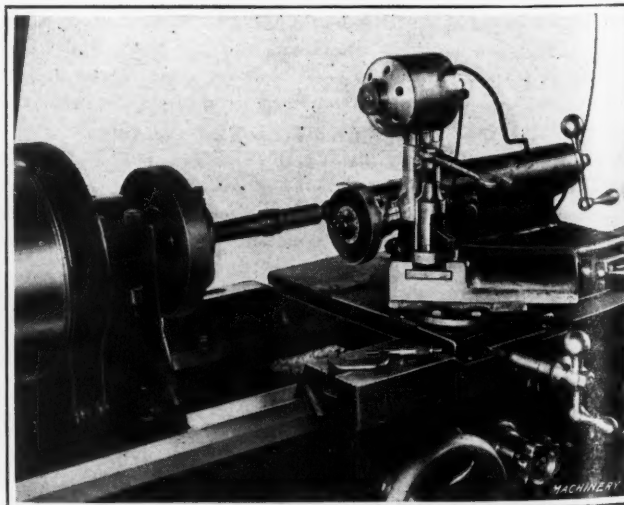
National Tool-room Grinder performing an External Grinding Operation
